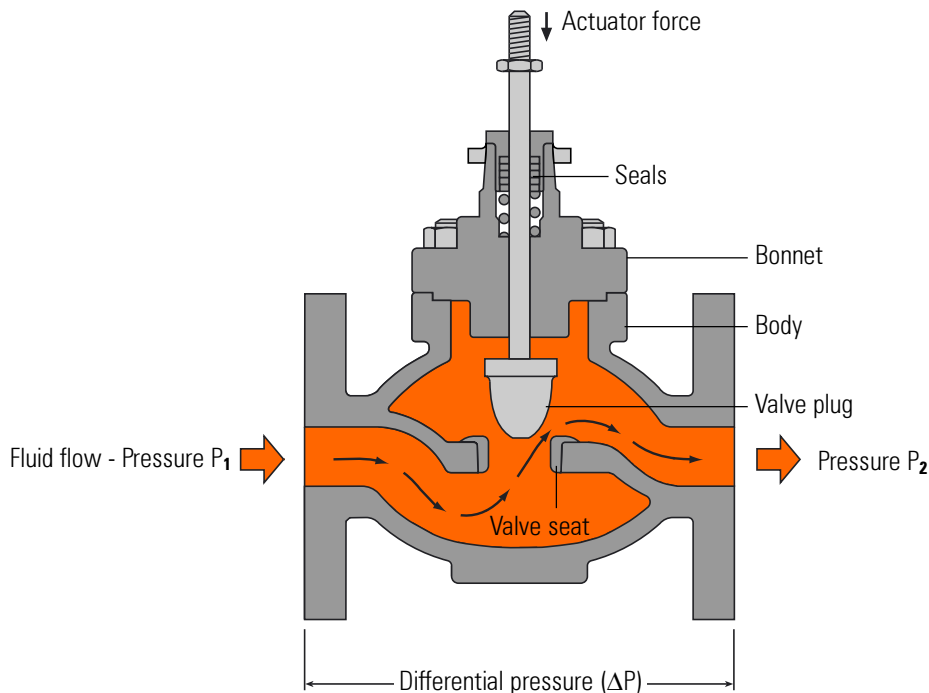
Flow through a single seat, two-port globe valve
